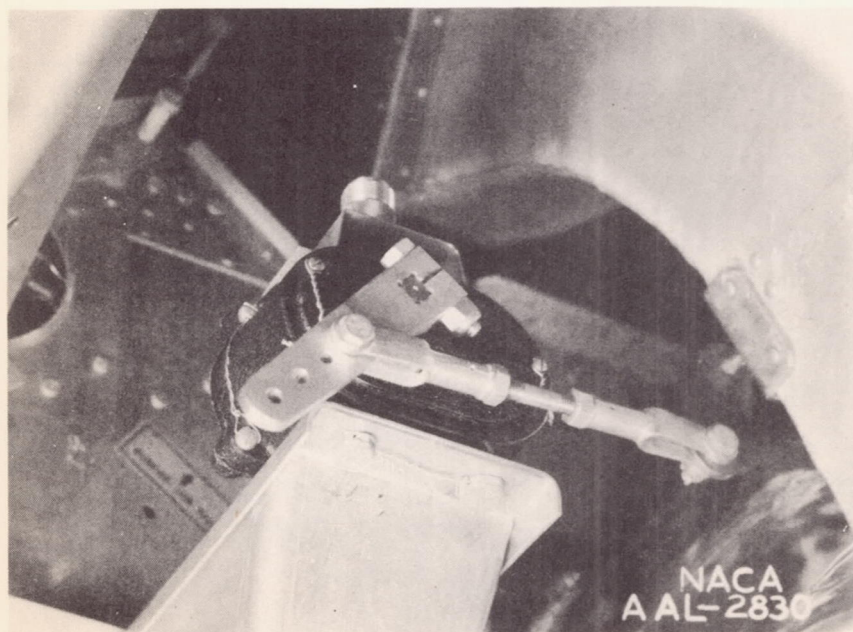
Installation of dump-valve drive motor at exchanger outlet in right outboard nacelle, B-17F airplane.
